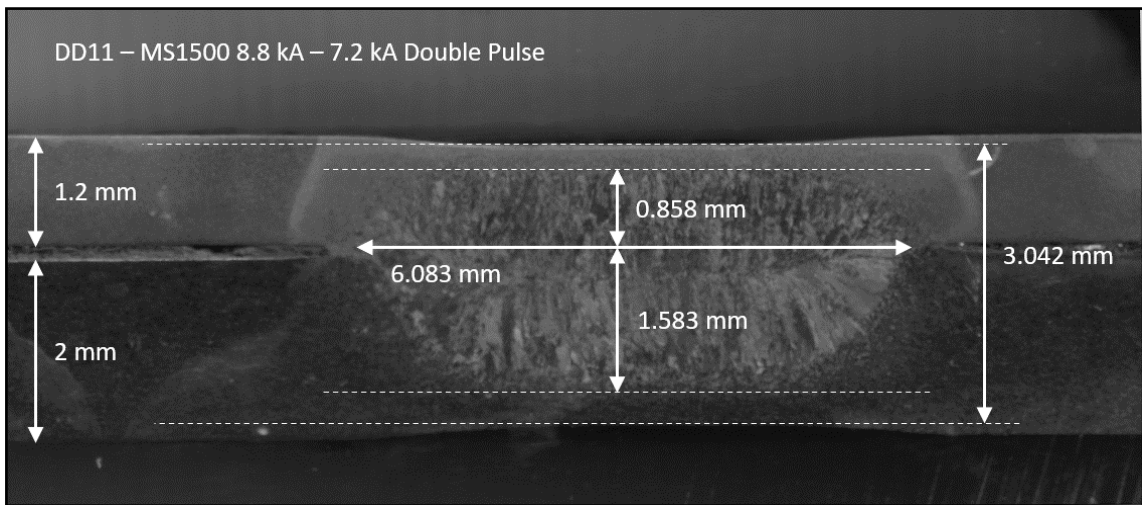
Weld nugget dimensions of DD11-MS1500 8.8 kA – 7.2 kA double pulse sample
